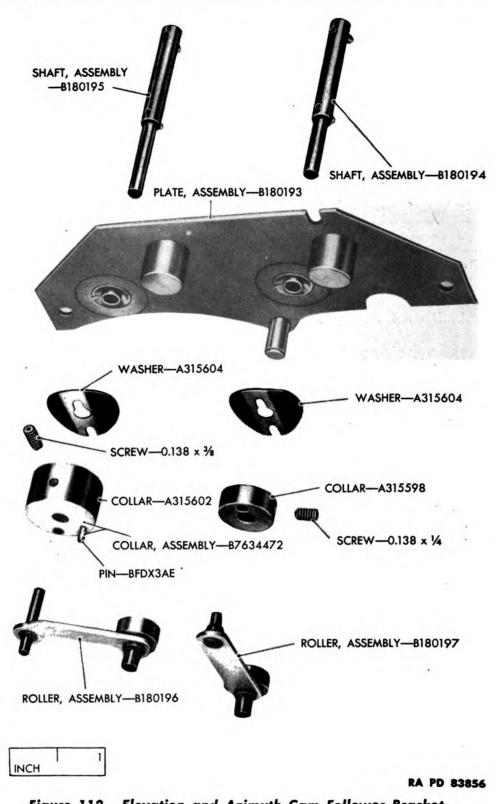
Elevation and Azimuth Cam Follower Bracket Assembly C82354 – Exploded View
